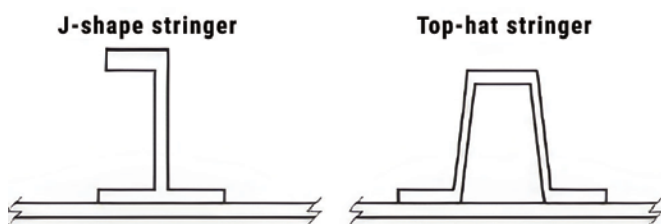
Illustration of the J-shape and top-hat geometry for upper wing stringer geometries.
